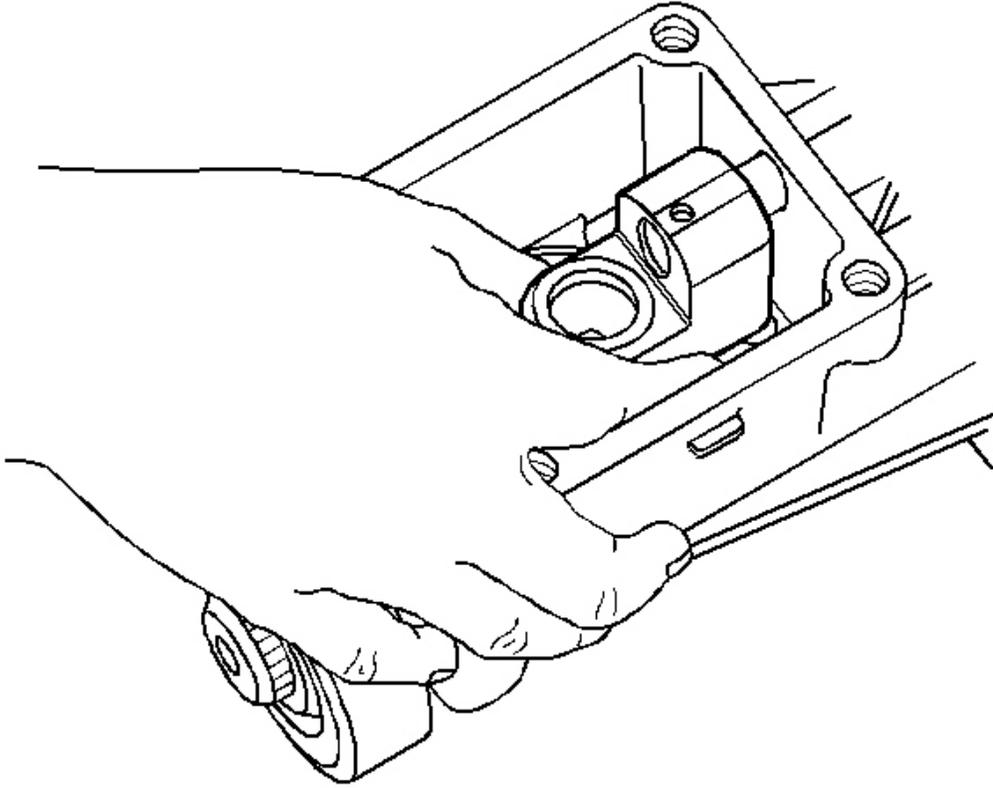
View Of Rear Offset Shift Lever & Isolator Cup
